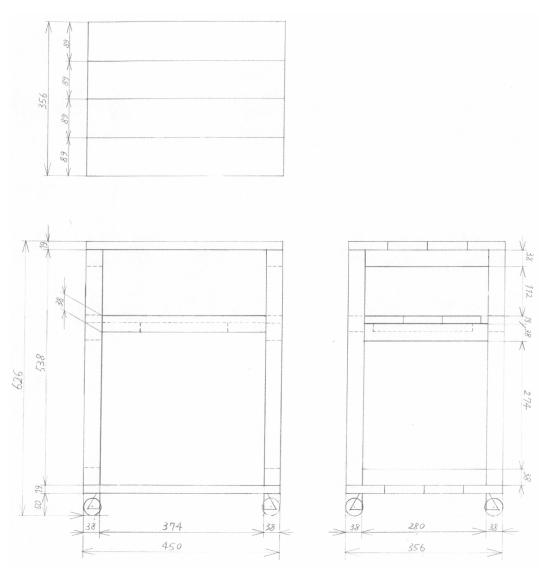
Projection of the multi-rack using the third-angle projection method (medium: pencil drawing; dimensions: 29.7×42cm).
